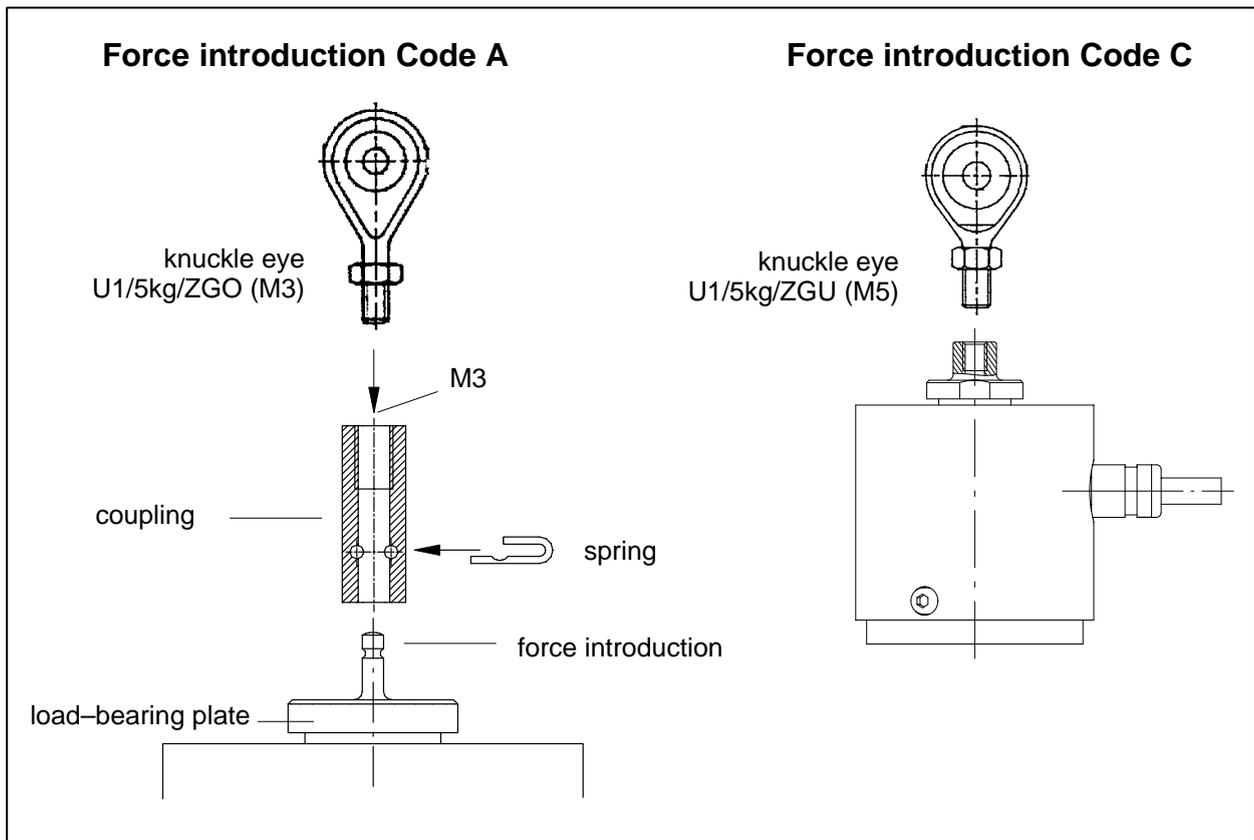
Mounting with coupling and knuckle eye ZGO
